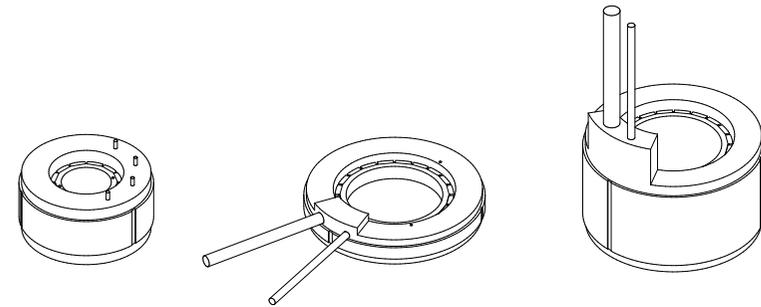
Axial flying lead (left), radial shielded cables (middle), axial shielded cables (right)
